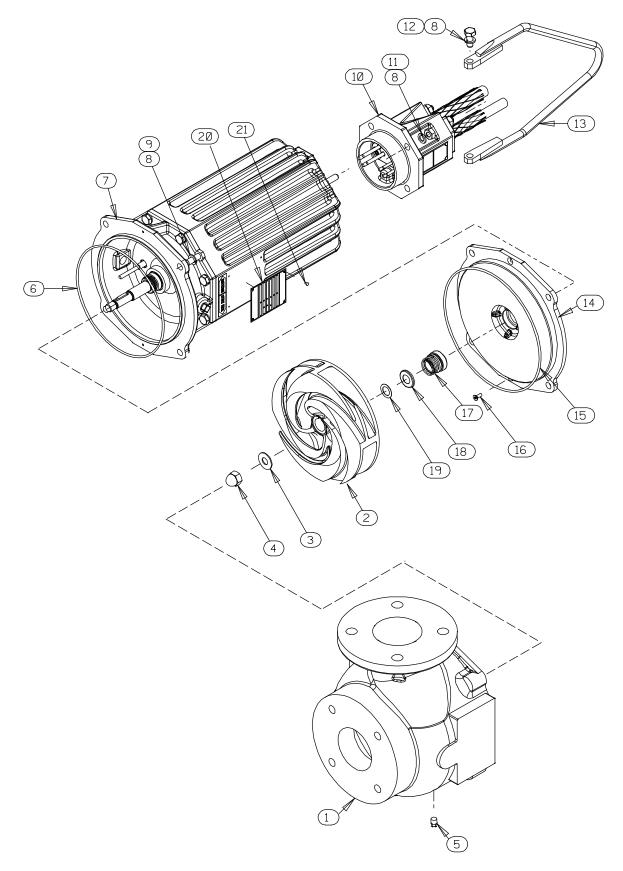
SFV3B–X & SFEV3B–X Pump Model Assembly
